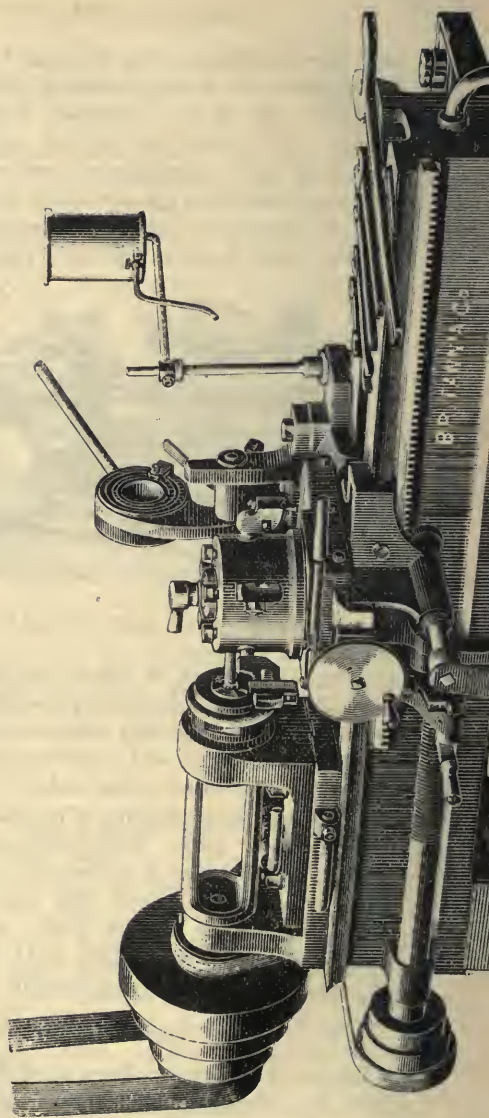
HEAVY SCREW-CUTTING LATHE, 12IN. CENTRES.
